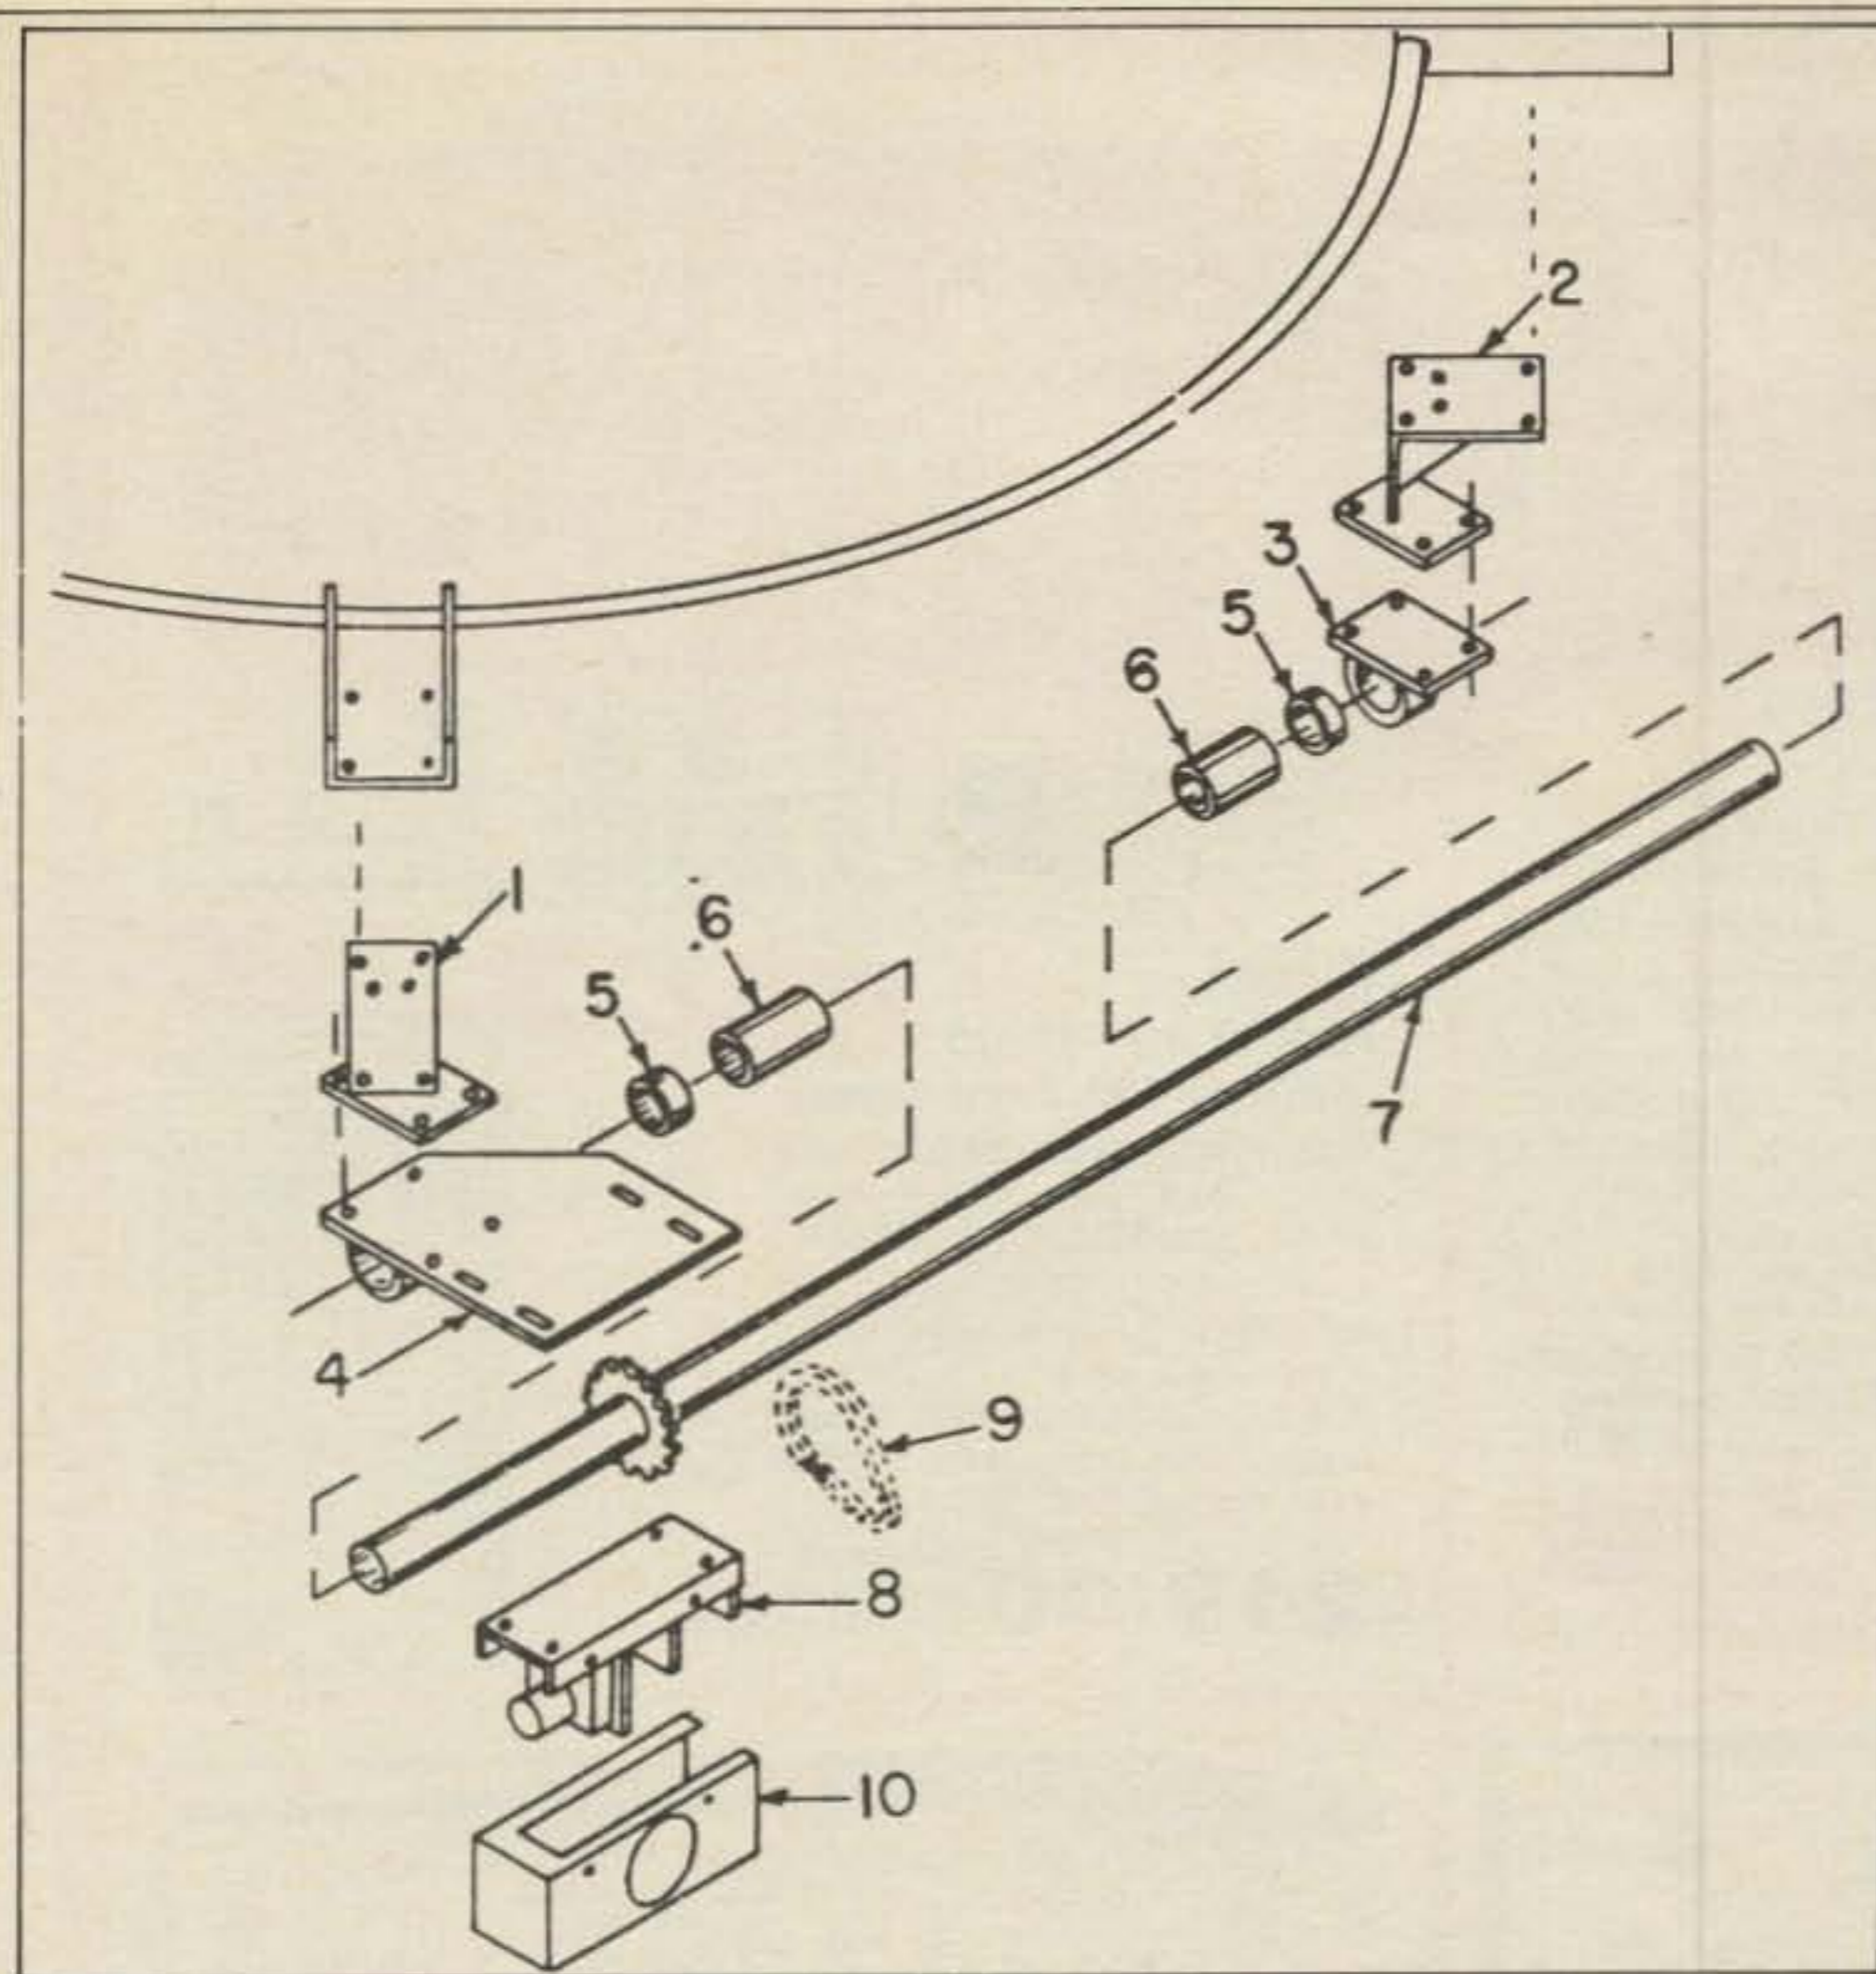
Here is an exploded view of the ER-1, the vertical rotator.
